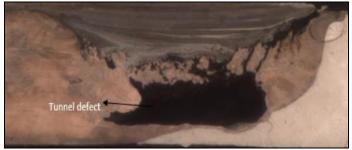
Showing a macrograph image of a FSW with tunnel defect appearance at the bottom toward advancing side in the stir zone when aluminum alloy 5052 on retreating side and stainless steel 304 on advancing side located and joined in FSW with zero tilt tool angle, low rotational speed, and slow weld travel speed. This study made by Chitturi et al. [76].
